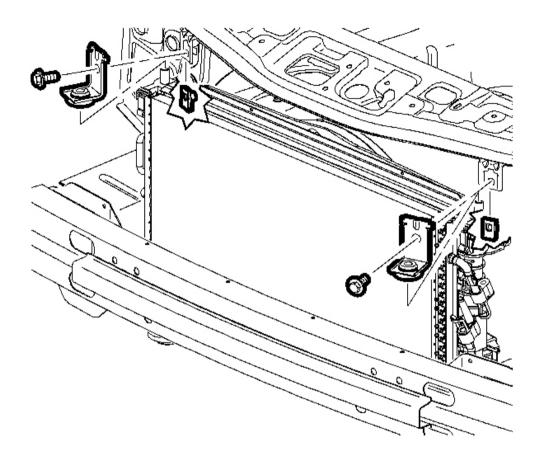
View Of CRFM Mounting Brackets To The Radiator Support Courtesy of GENERAL MOTORS CORP.
